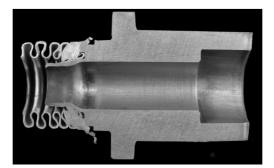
Macrostructure of high speed friction welded joint
